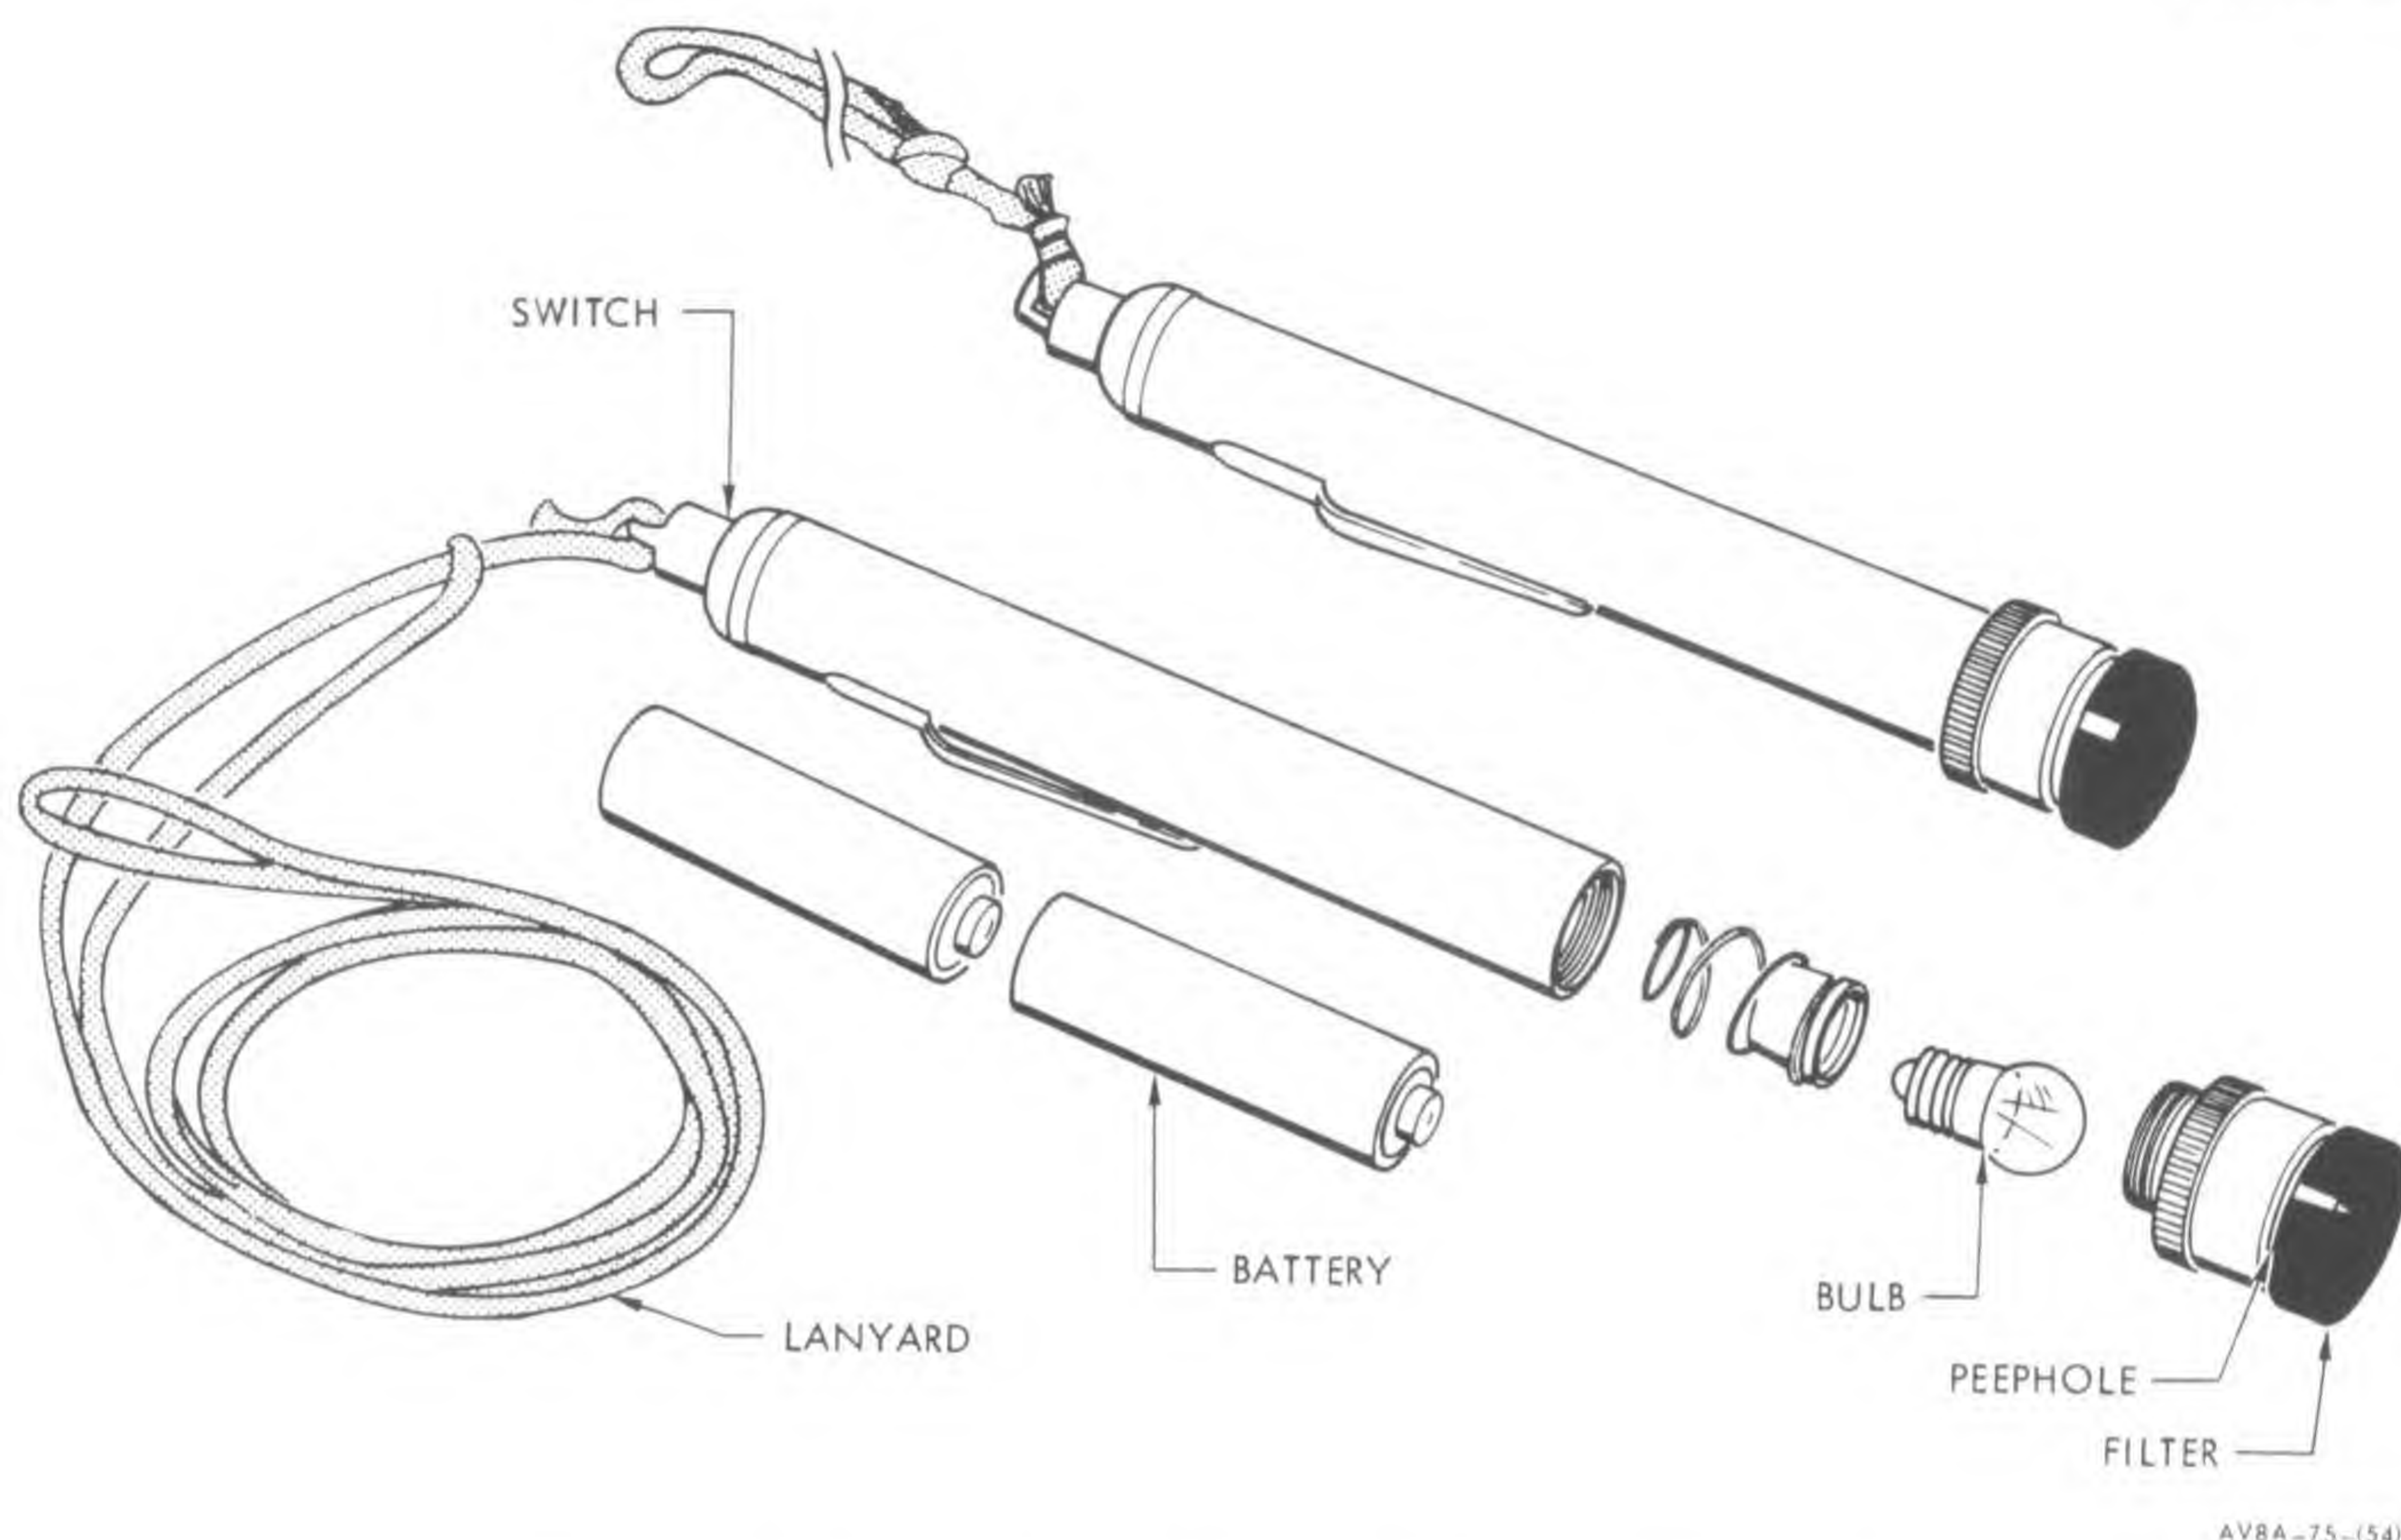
Tester, Guided Missile, IR Source, TTU-304/E
